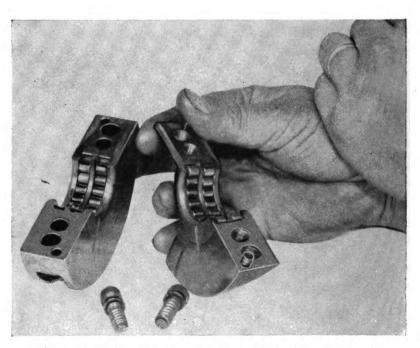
Halves of center bearing. (Note roller bearing in center-bearing retainers.)
